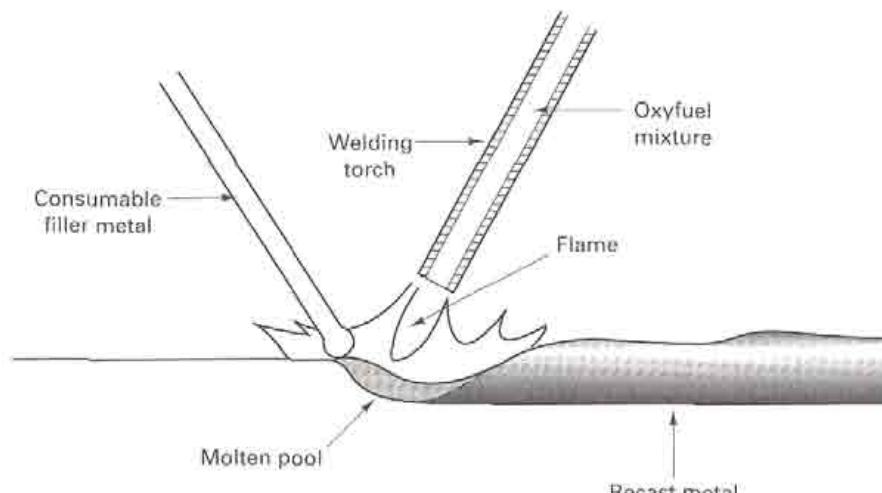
Oxyfuel-gas welding with a consumable welding rod.
